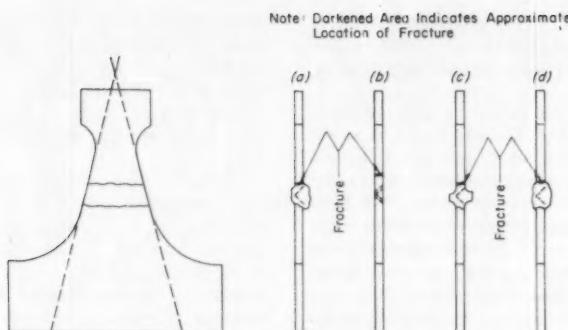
Test specimen with weld perpendicular to specimen axis.
